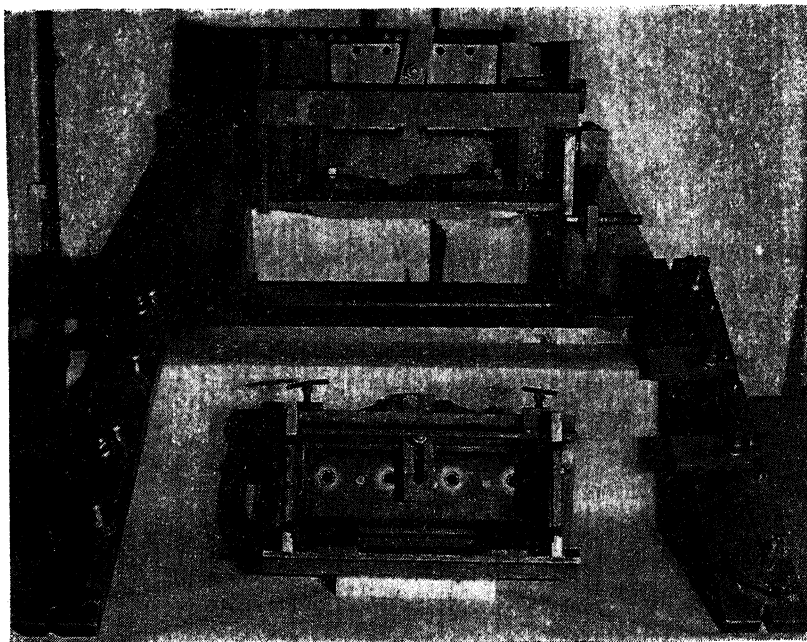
Trunnion jig built by arc welding at savings of 25%.
